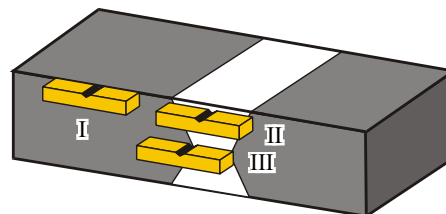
Scheme of notch locations in a welded joint, /11/
